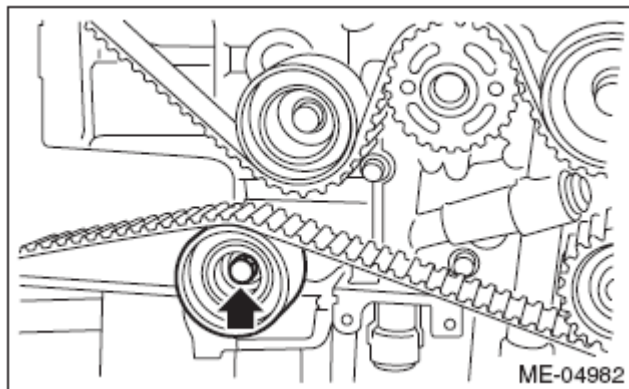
Removing Stopper Pin From Tensioner Adjuster
